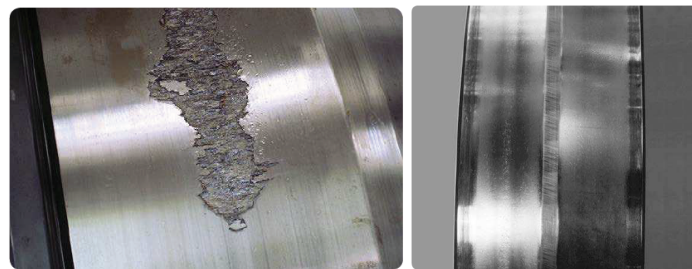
Fatigue failure. Subsurface-initiated (left) and surface-initiated (right) [27]. Courtesy of SKF.
